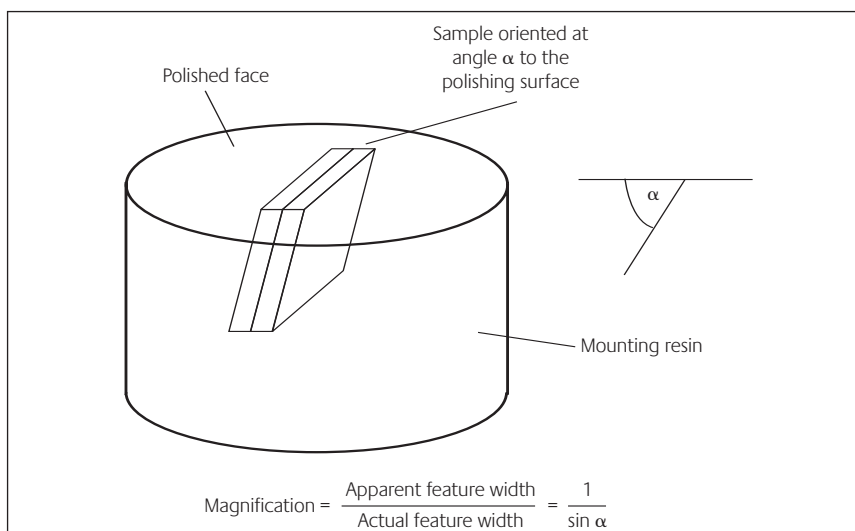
Method of mounting sample at a taper for magnification of joint width
